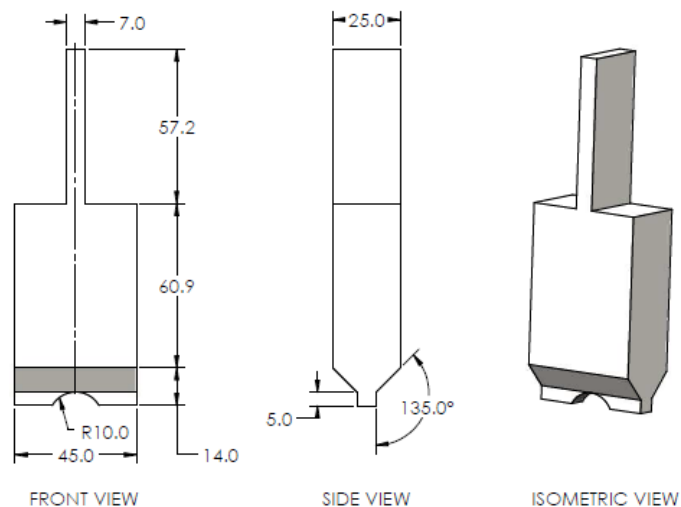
Design of fixture used in bending-torsion fatigue. All dimensions are in mm.
